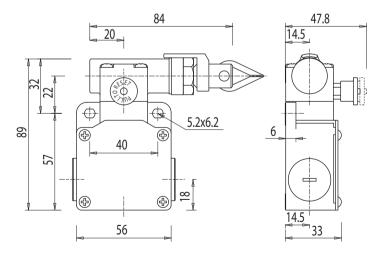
Dimensions ERS200-MxC3x-HAR in mm
